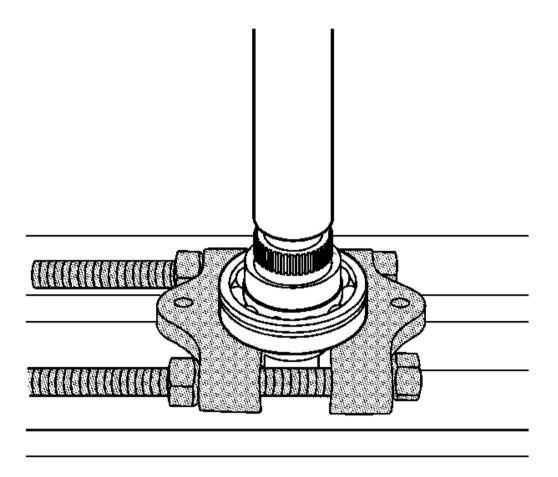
View Of J 22912-01 Courtesy of GENERAL MOTORS CORP.
